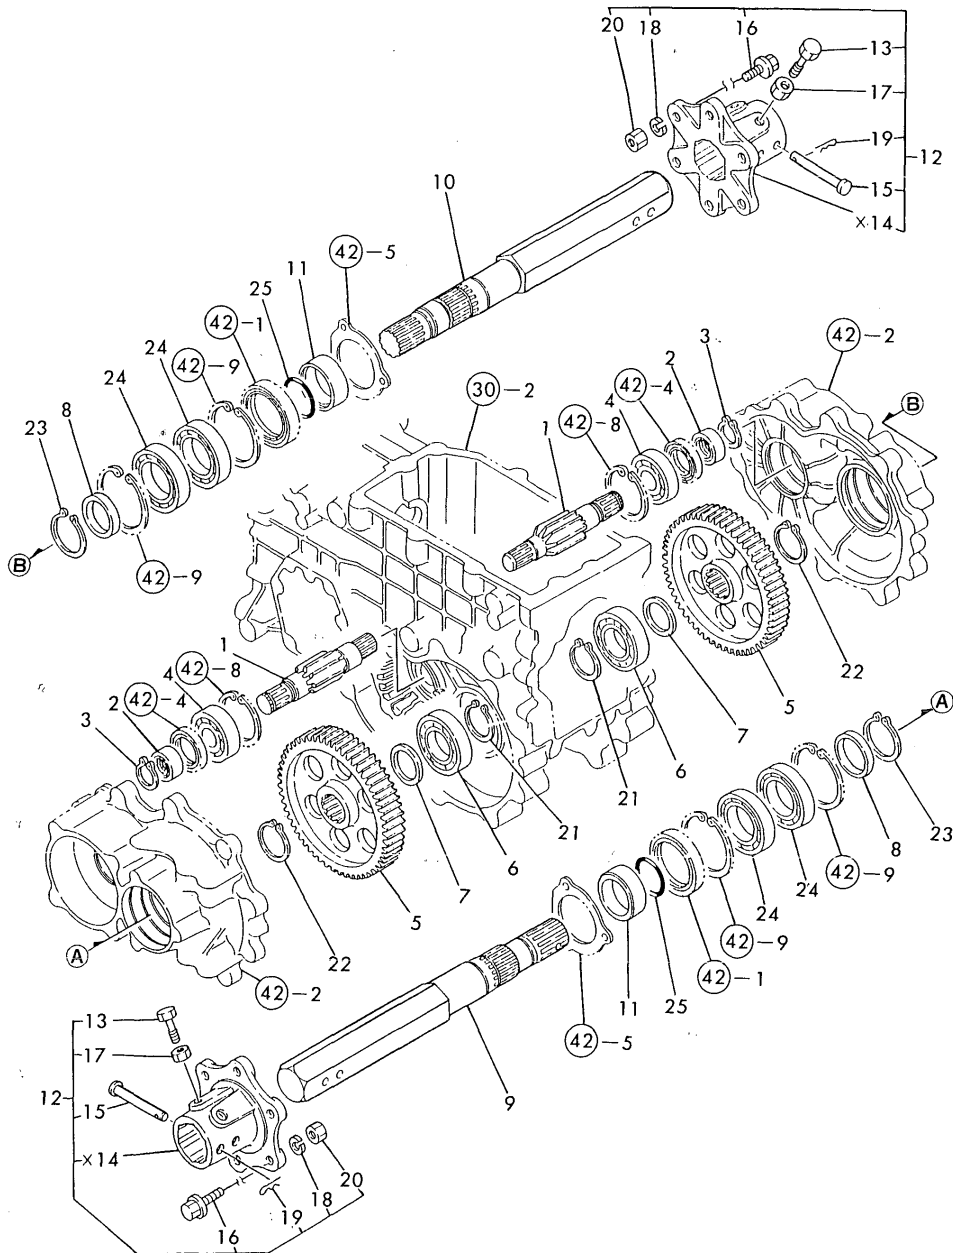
REAR AXLE HOUSING & DIFF. LOCK
